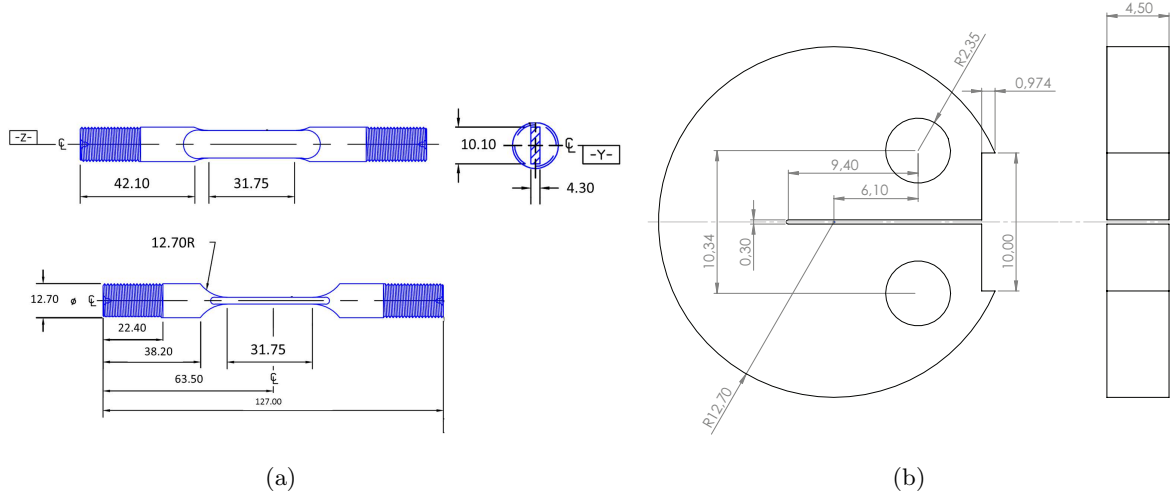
Technical drawing of (a) the Kb specimen and (b) the DCT specimen with dimensions in mm.
